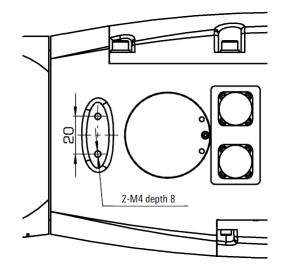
Dimension drawing of AIR8-710A type manipulator arm interface
